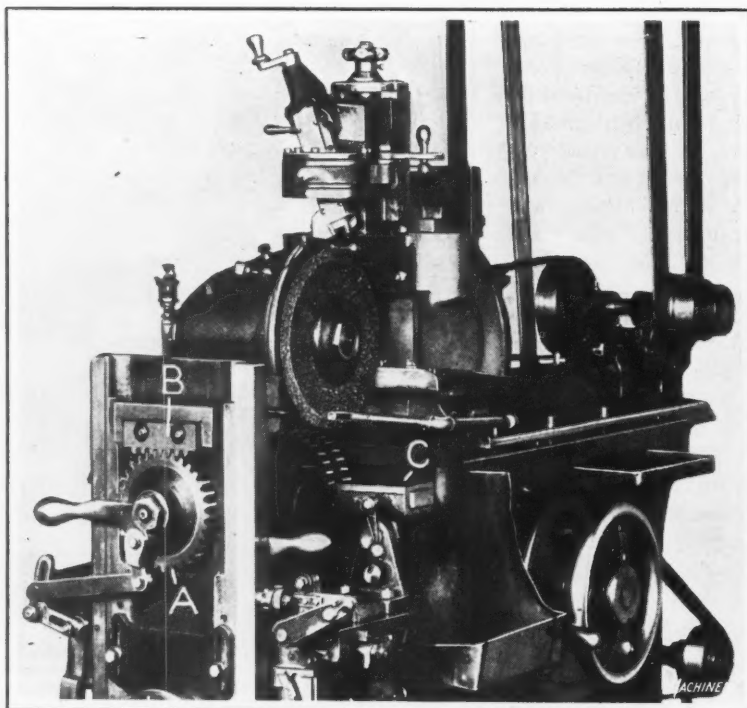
Front View of Machine illustrated in Fig. 7, showing Master Gear and Rack Mechanism for controlling Indexing and Generating Movements
